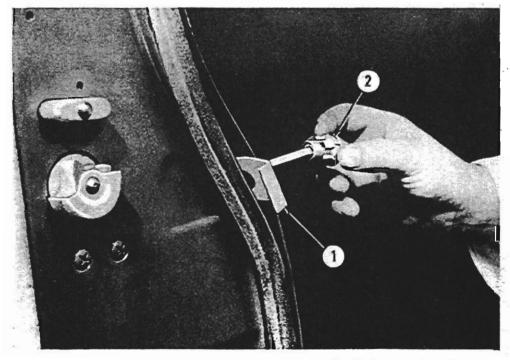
After Pulling the Retaining Clip To Release the Case, Pull the Case and Cylinder Assembly Out of the Door.
